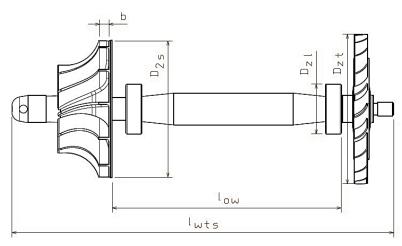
Basic dimensions of mSO-1 turbojet engine rotor
